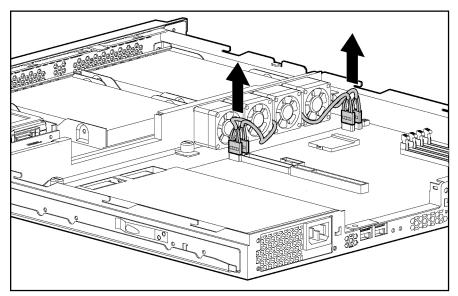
Disconnecting the center wall fan cables (processor removed for clarity)
